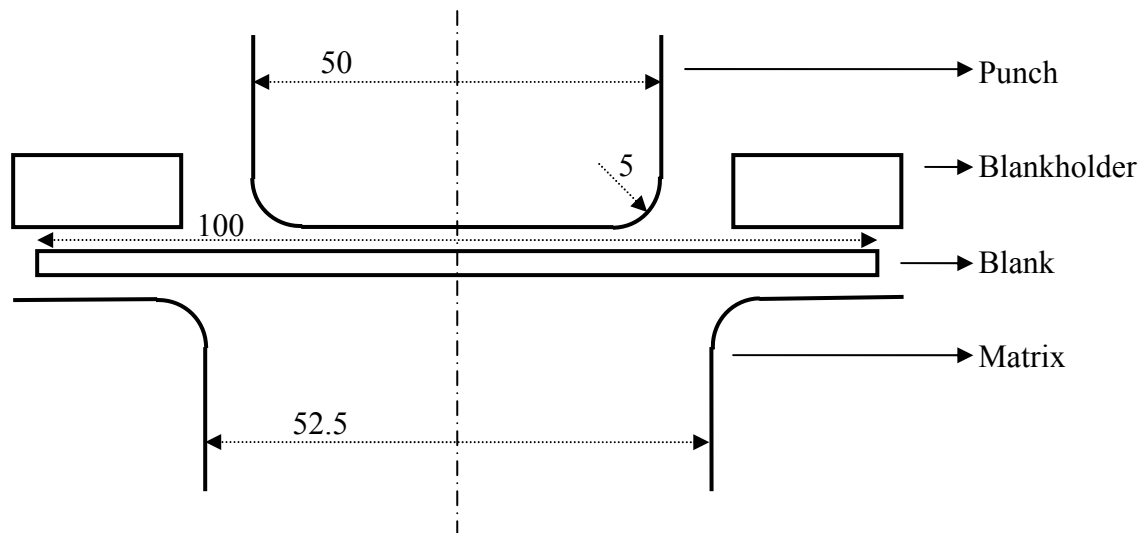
Geometry of the tools and the blank (dimensions in mm)
